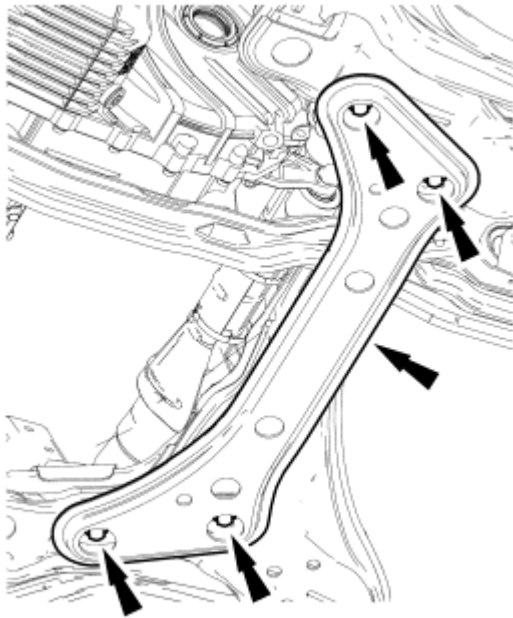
Identifying Front Roll Restrictor Bolt & Bolts For Engine Support Crossmember
